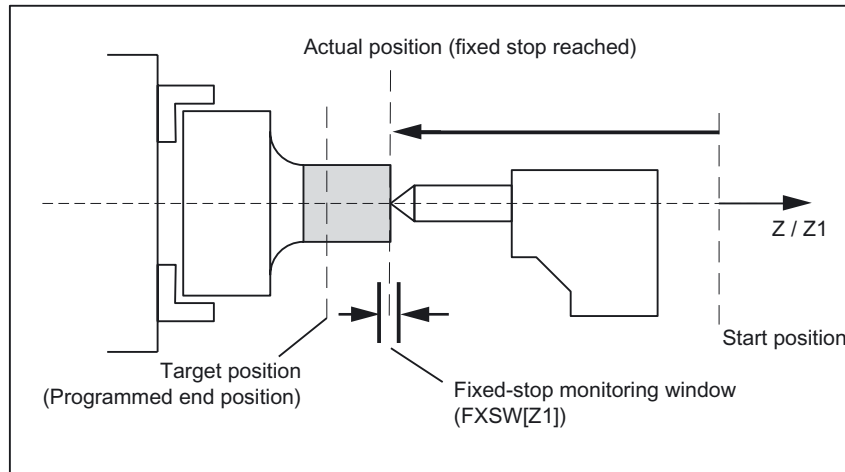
Example for travel to fixed stop, a quill is pressed onto the workpiece
